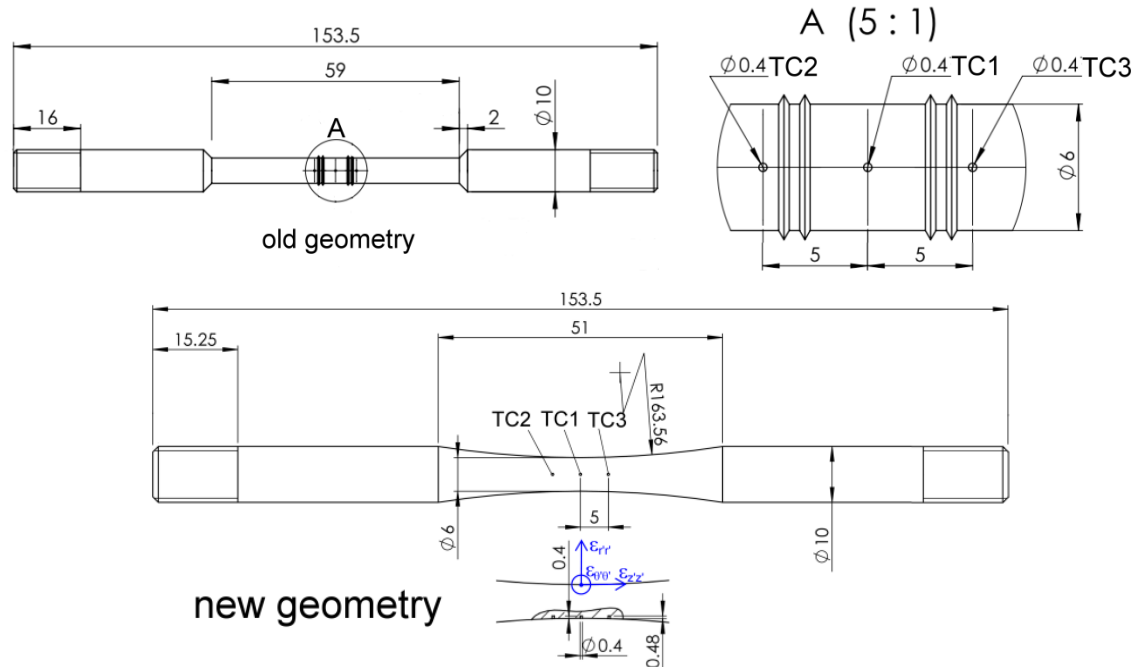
Specimen geometries used for tensile tests in the Gleeble machine (dimensions in millimeters).
